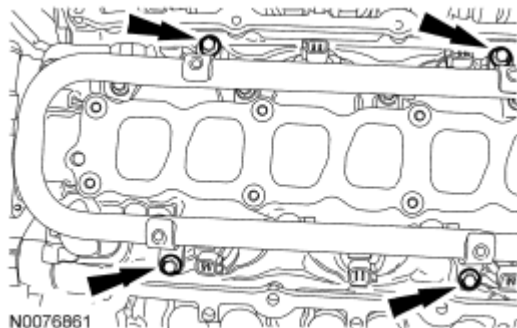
Locating Fuel Rail & Injectors Assembly Bolts
